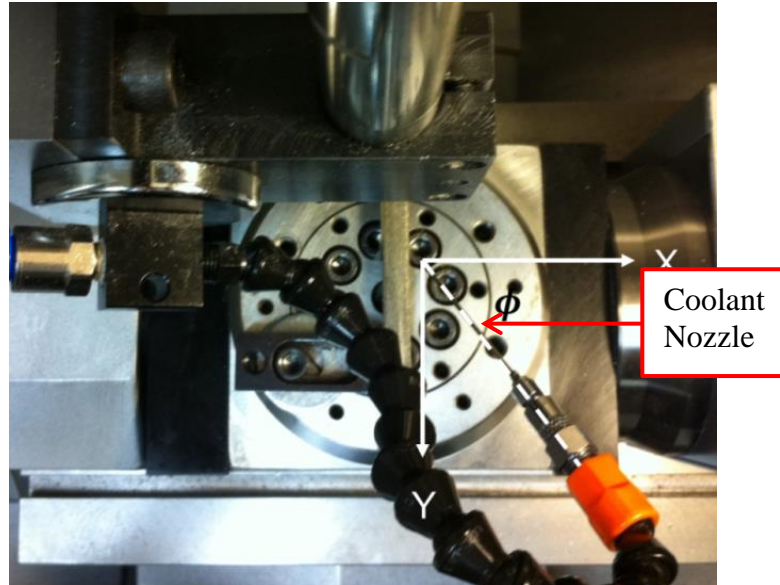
Coolant Nozzle Positioning (Top View) [6].
